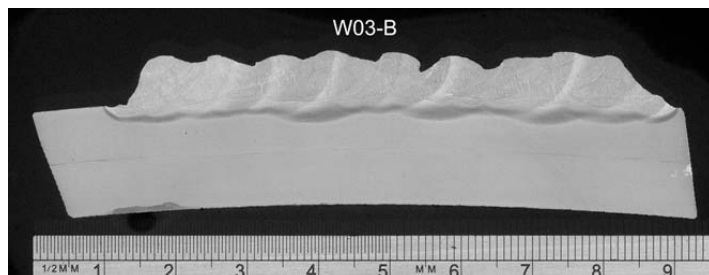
Macrosections taken through the samples relating to test weld W03. Scale ruler shown:
